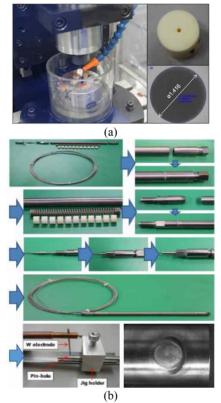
Fabrication process of an instrumented fuel rod (a) drilling of a sintered alumina pellet (b) assembly of a fuel rod.
